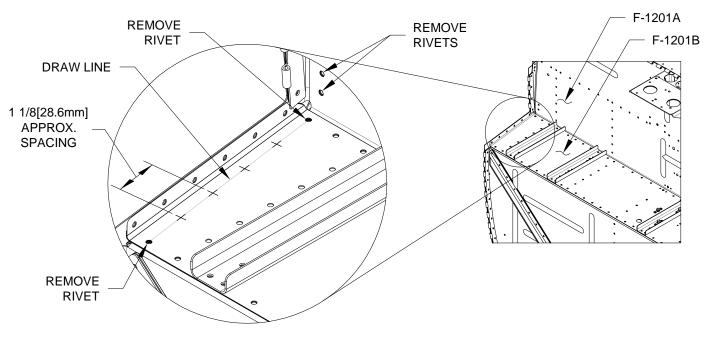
REMOVE RIVETS & LAY OUT HOLES
